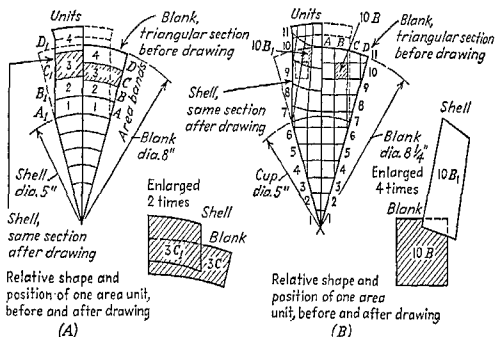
Two methods of marking blanks to illustrate size, shape, and position of the units of area, before and after drawing.¹
